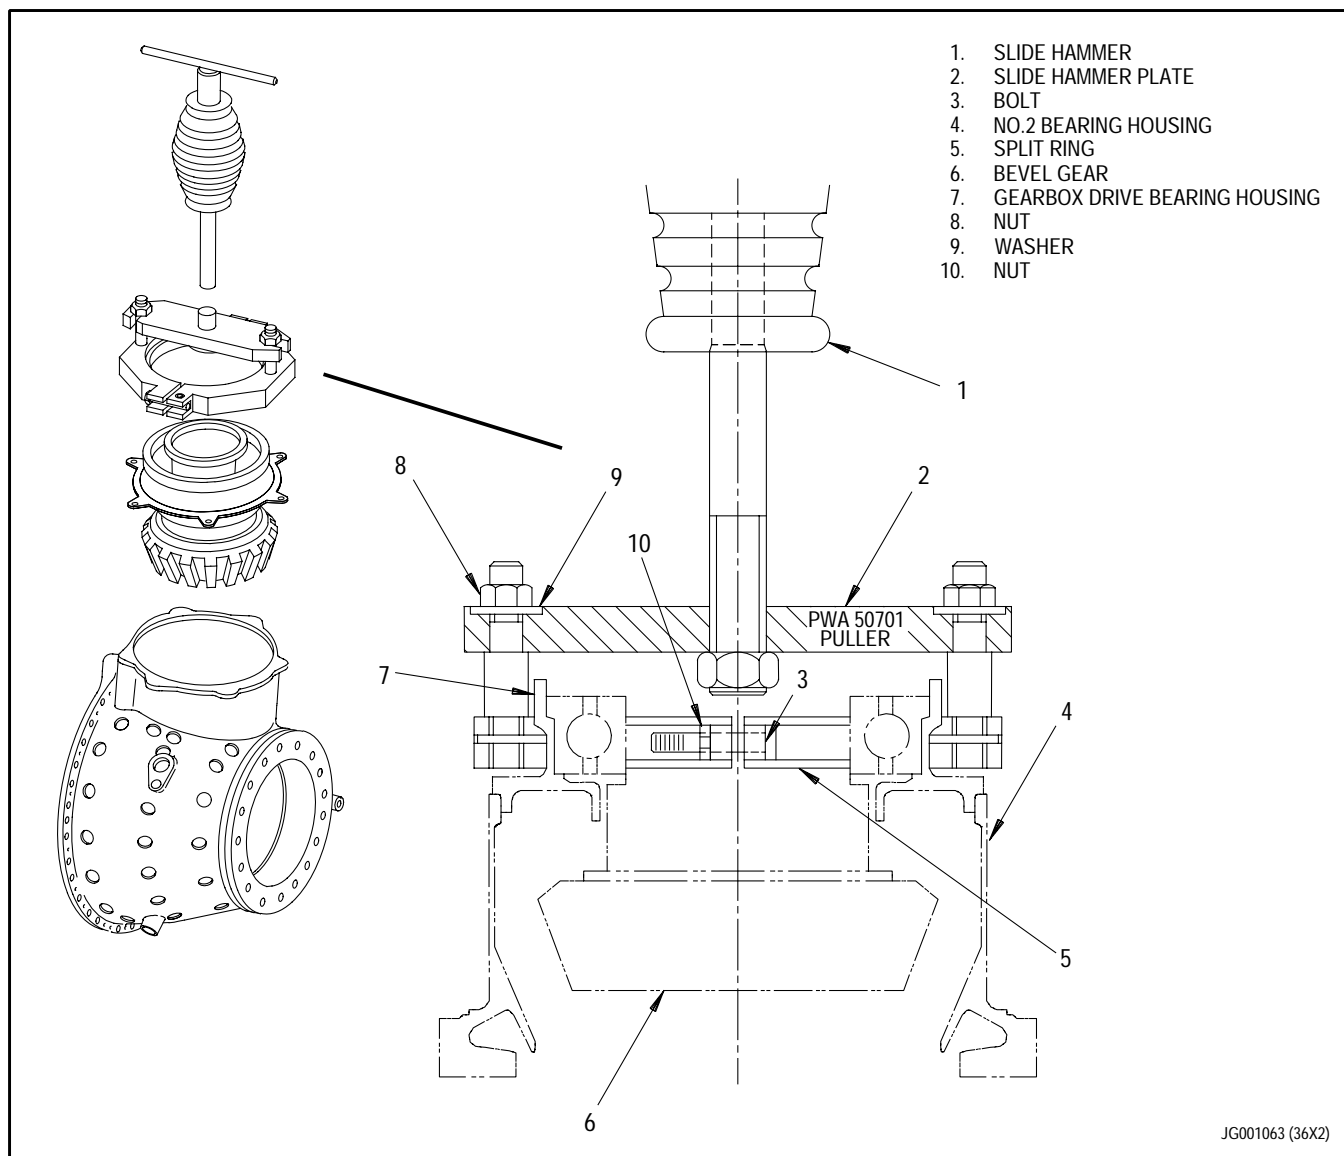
Gearbox Bevel Drivegear Assembly - Removal with PWA 50701 Puller
